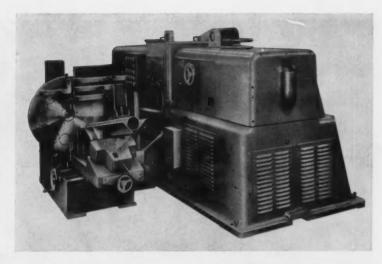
Storage door in base of machine opened to show pick-off gears for changing spindle speed
